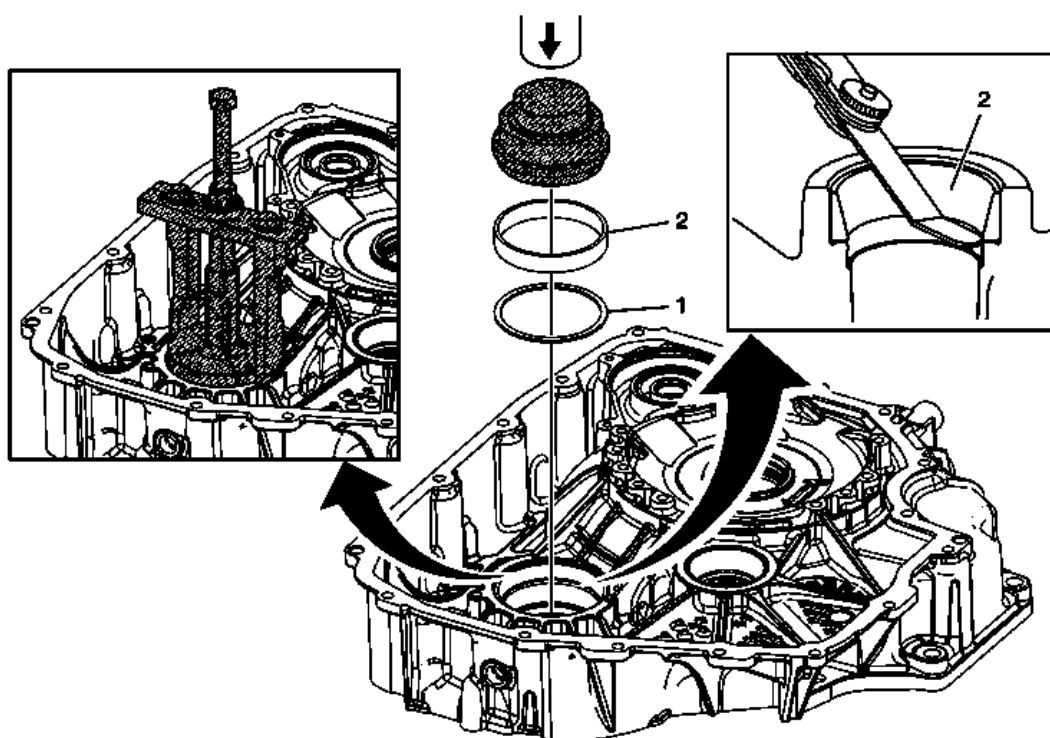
Front Differential Carrier Bearing Cup & Washer - Torque Converter Housing Side
